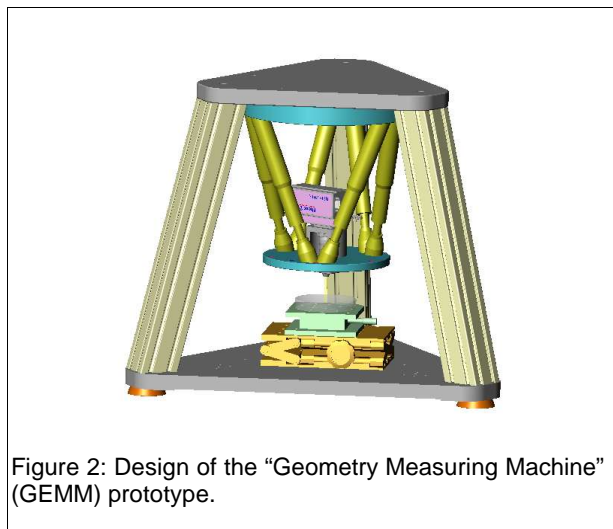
Design of the “Geometry Measuring Machine” (GEMM) prototype.
